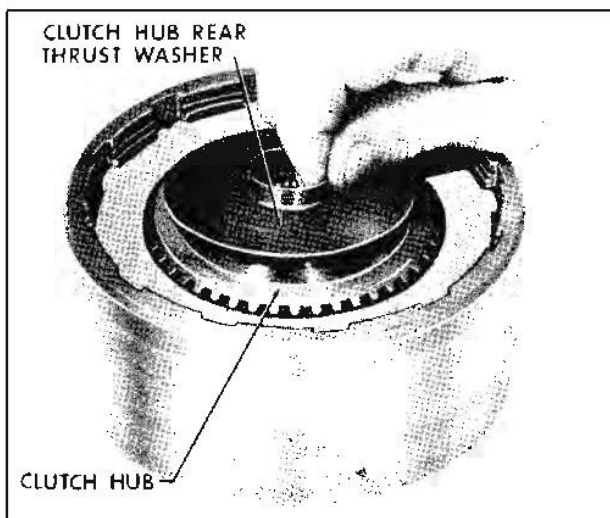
B-72 Removing Clutch Hub Rear Thrust Washer
